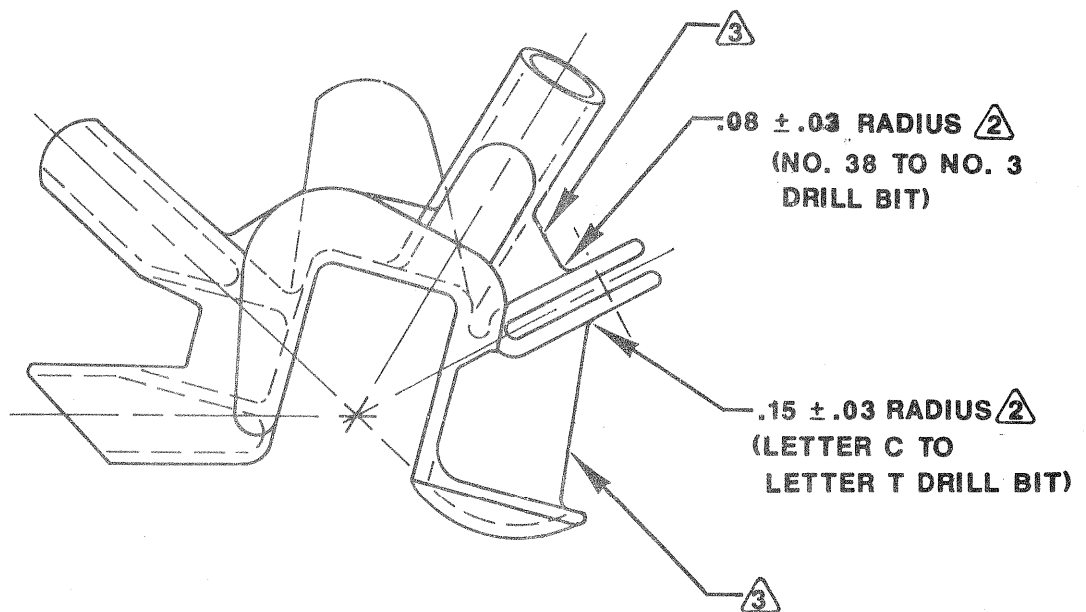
INSPECTION OF CLUSTER FITTINGS
